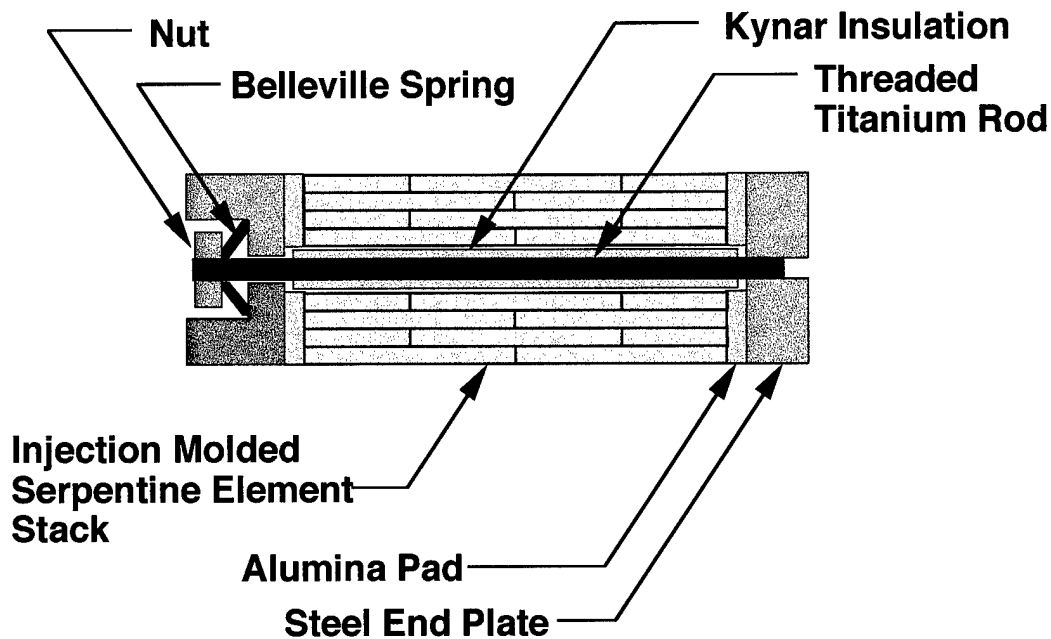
The linear serpentine-driven actuator was designed to use a Belleville spring to maintain a compressive preload and Kynar film and alumina plates to provide electrical insulation from the center rod and end plates.
